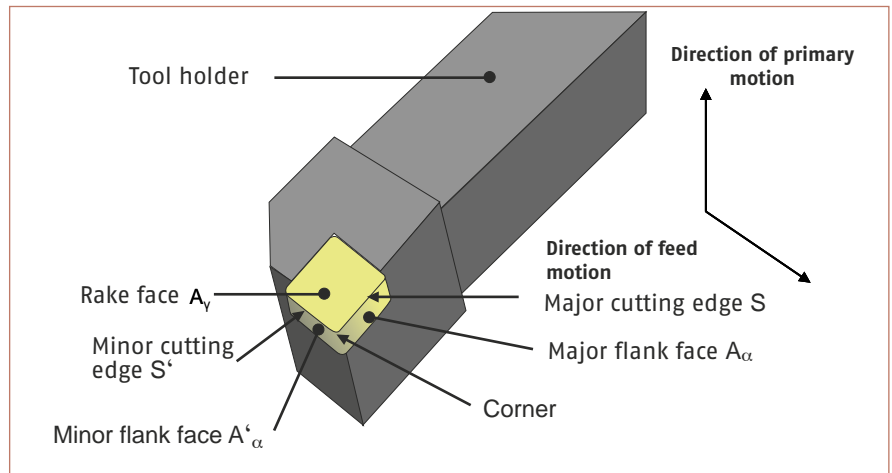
Face, flanks, cutting edges and corner of a turning tool (DIN 6581)
